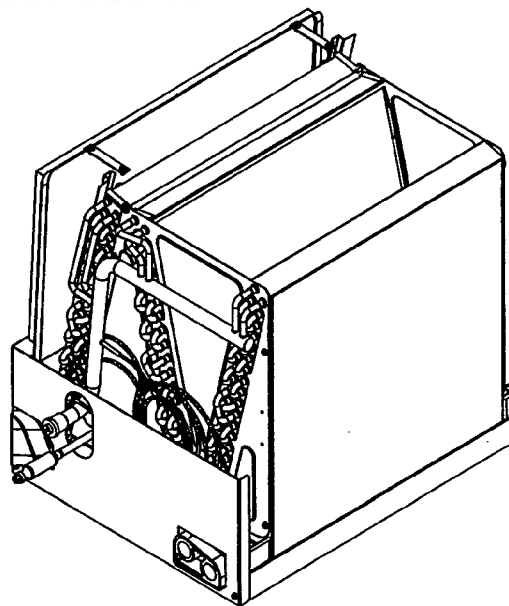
UNCASSED COIL ADAPTER KIT ASSEMBLED
